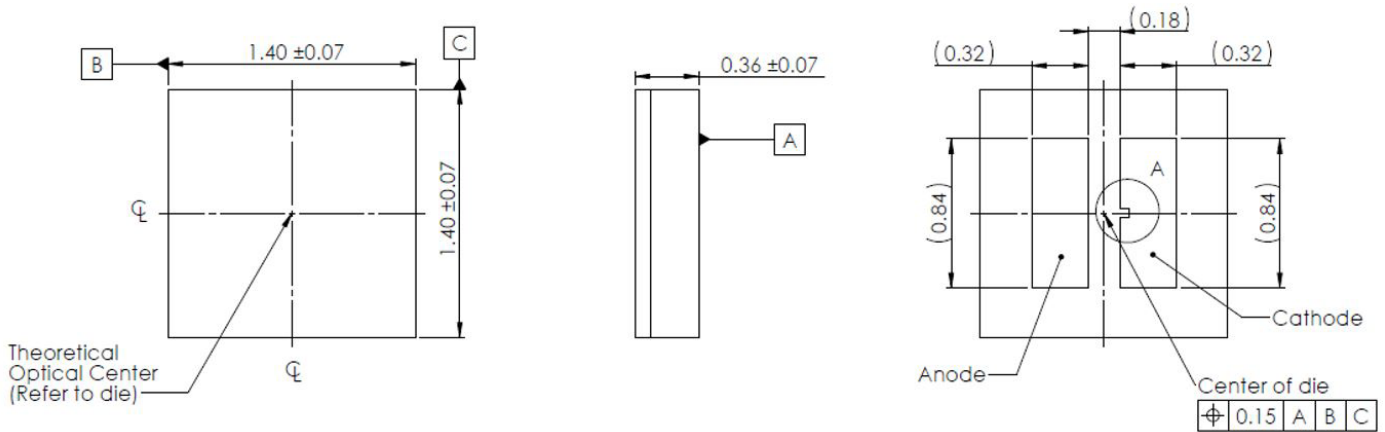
Mechanical dimensions for LUXEON HL1Z Color Line
